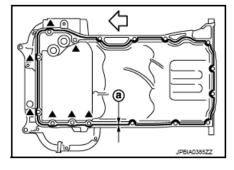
Identifying Liquid Gasket Applying Dimension Of Cylinder Block Mating Surface Of Oil Pan (Upper)
